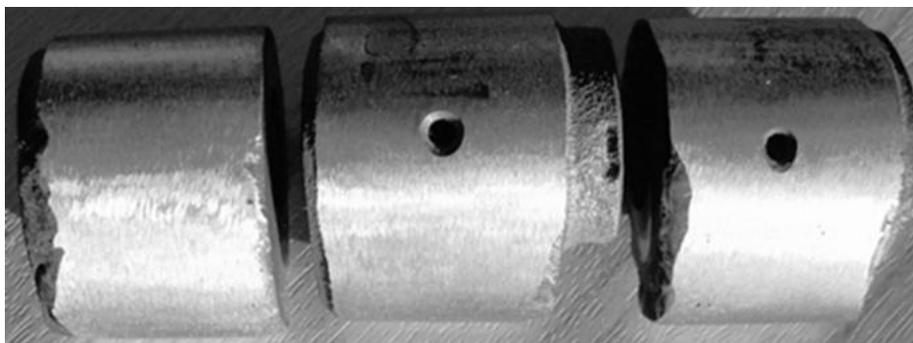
Flaws of cladded surfaces of cam and its shaft with conventional TIG method
